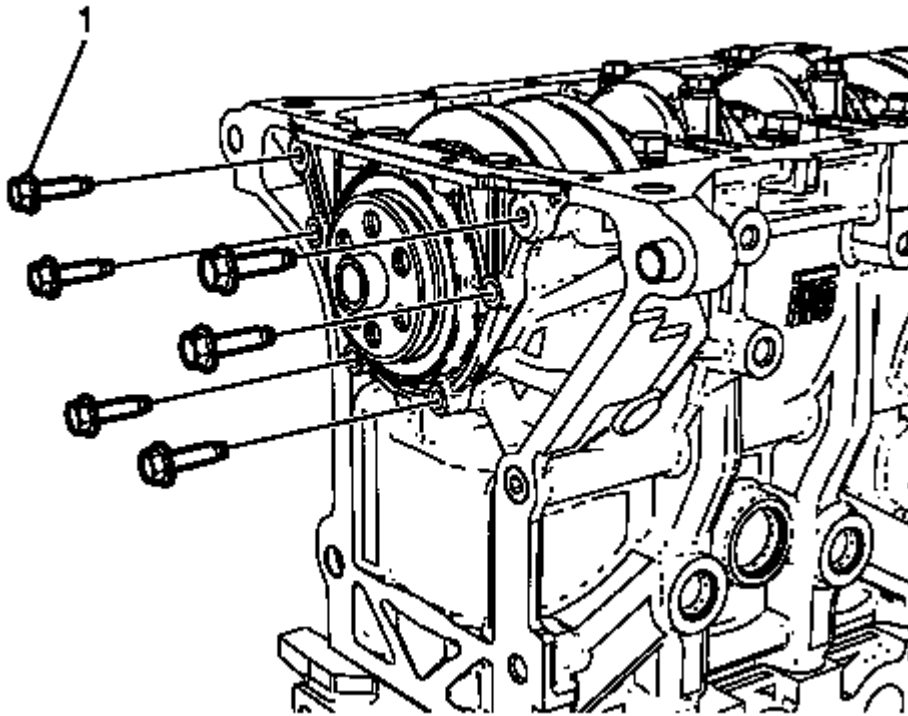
Crankshaft Rear Oil Seal Housing Bolts
